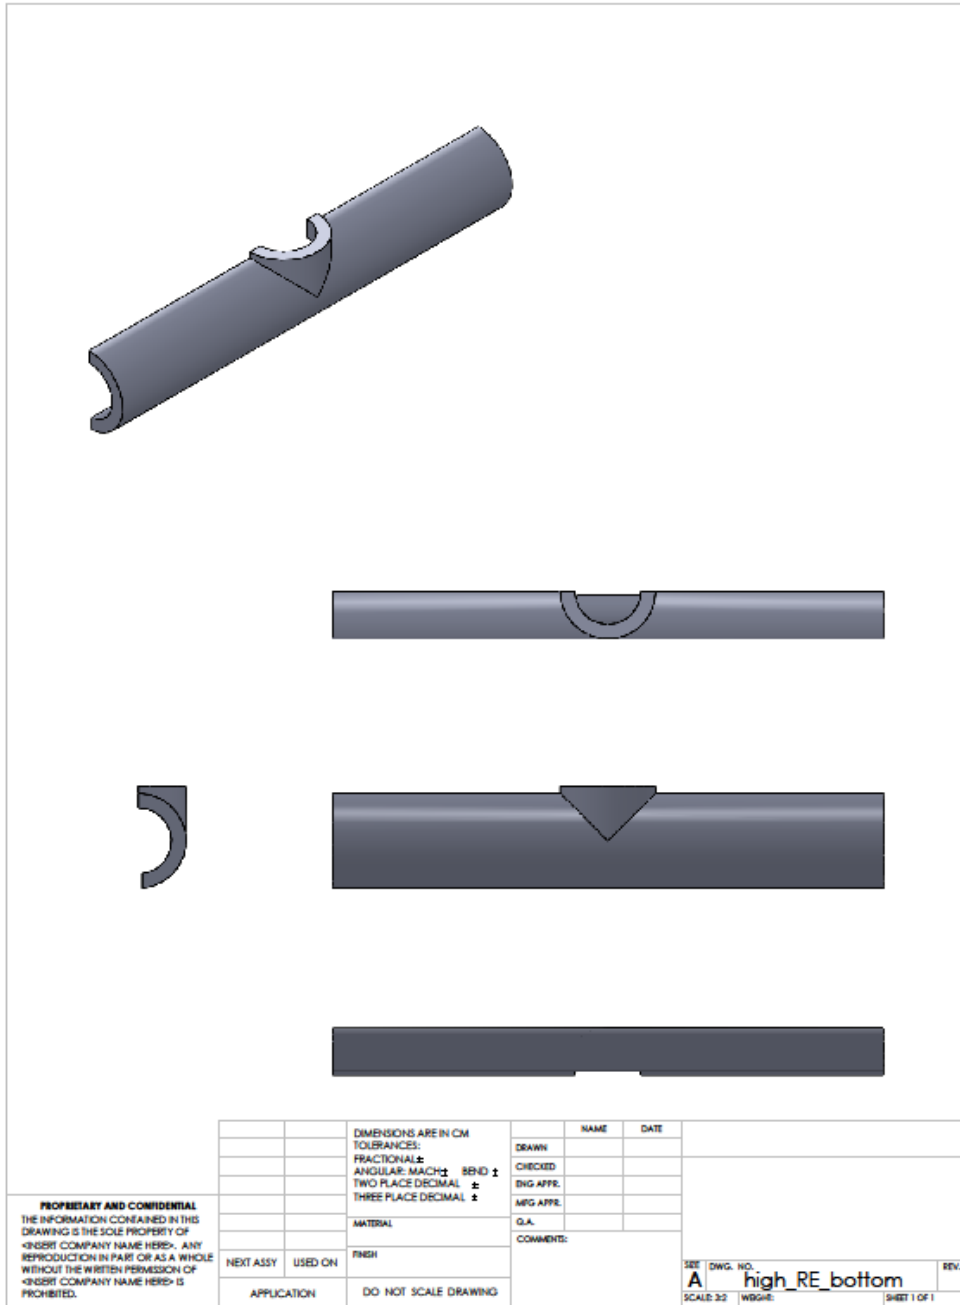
Front, top, bottom, side and isometric view of the secondary component of the order-100-Re line source.
